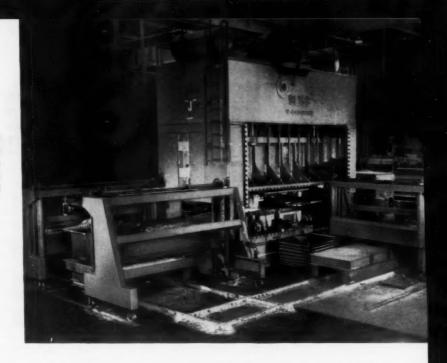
The view shows the first unit of a fourpress welding installation for the Plymouth rear floor-pan assembly.
